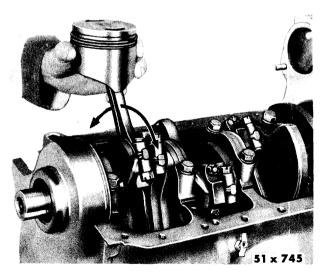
Checking Connecting Rod Bearing Clearance (Typical)
